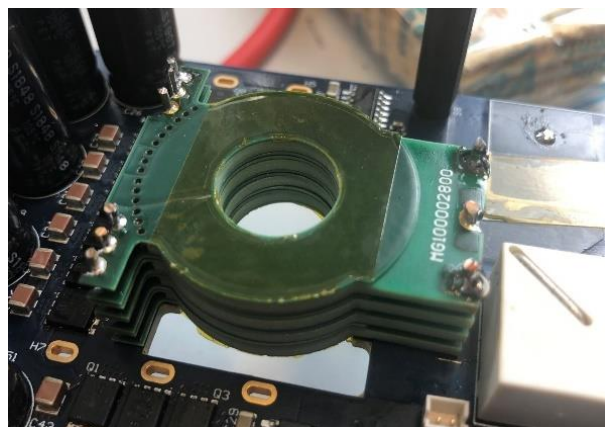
Photograph of the primary and secondary side PCB windings of the planar transformer soldered onto the main board.
